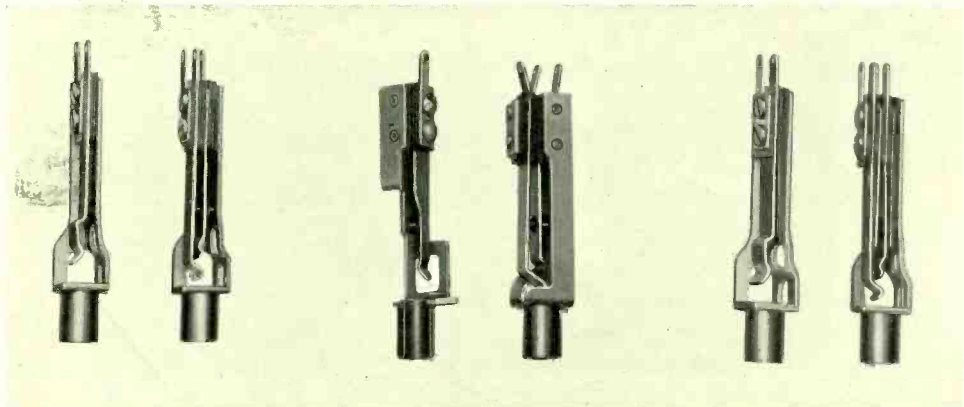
Jacks punched from sheet metal succeeded cast-frame jacks. The third and fourth jacks are of the early "U" frame type, and part of the third is cut away to show the construction. An improved frame design, having a right angle instead of a "U" cross-section which gives a more rigid mounting, is embodied in the jacks shown at the left. At the right are shown jacks with cut-off springs which are associated with the line springs. The two previous types have line springs only
